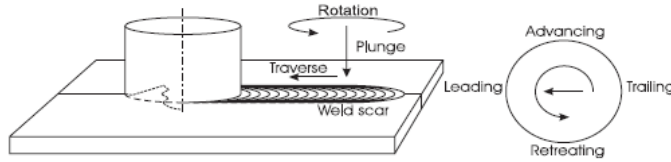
Schematic drawing of Friction Stir Welding [2]
